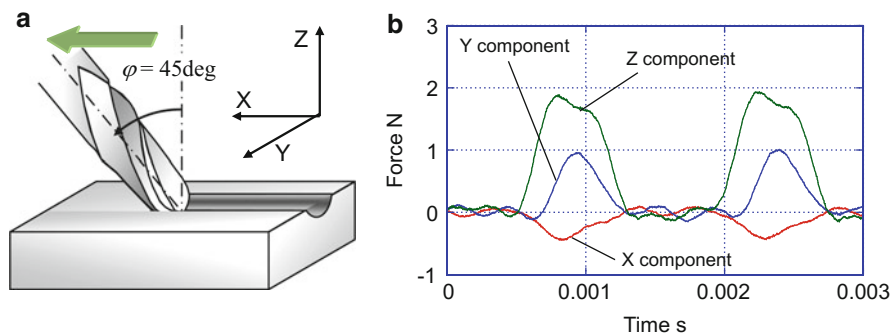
Milling process with cutter axis inclination: (a) cutting with inclined ball end mill; (b) an example of cutting force. Cutting conditions: depth of cut, $20\ \mu\text{m}$; spindle speed, 2000 rpm; feed rate, $0.48\ \text{mm}/\text{min}$; and lubrication, water. Tool: material, carbide coated by TiAlN; and diameter, $0.4\ \text{mm}$
